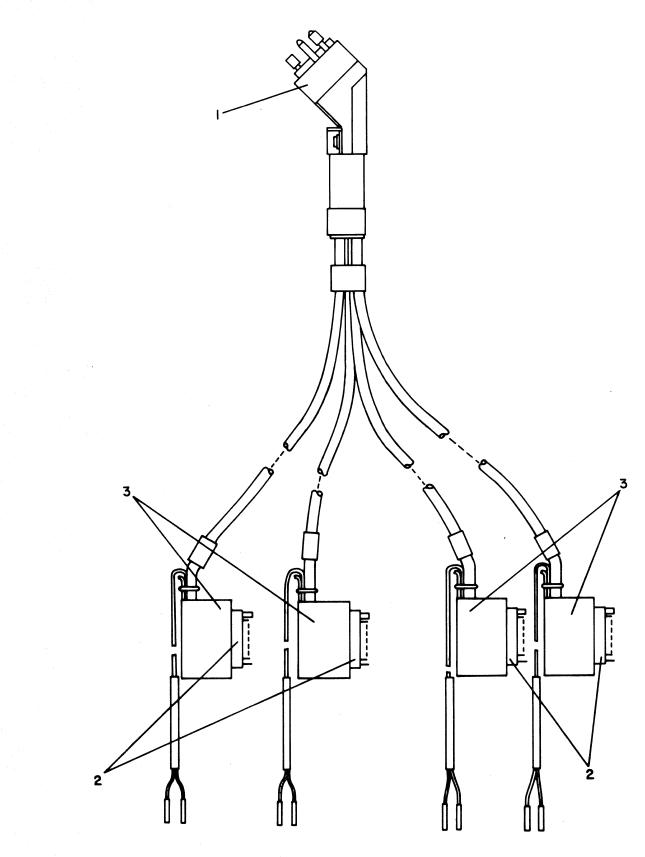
READ CABLE ASSEMBLY (W12 THRU W15)
